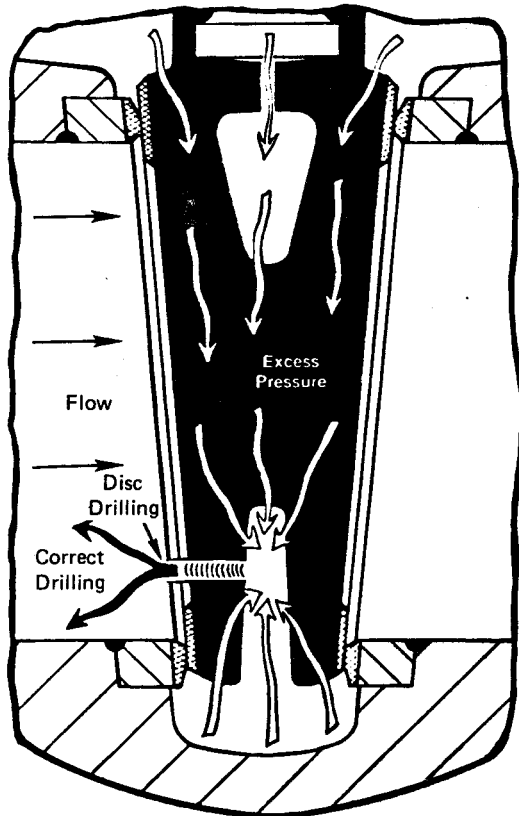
A hole on the upstream side of wedge to release built-up pressure in bonnet cavity.
